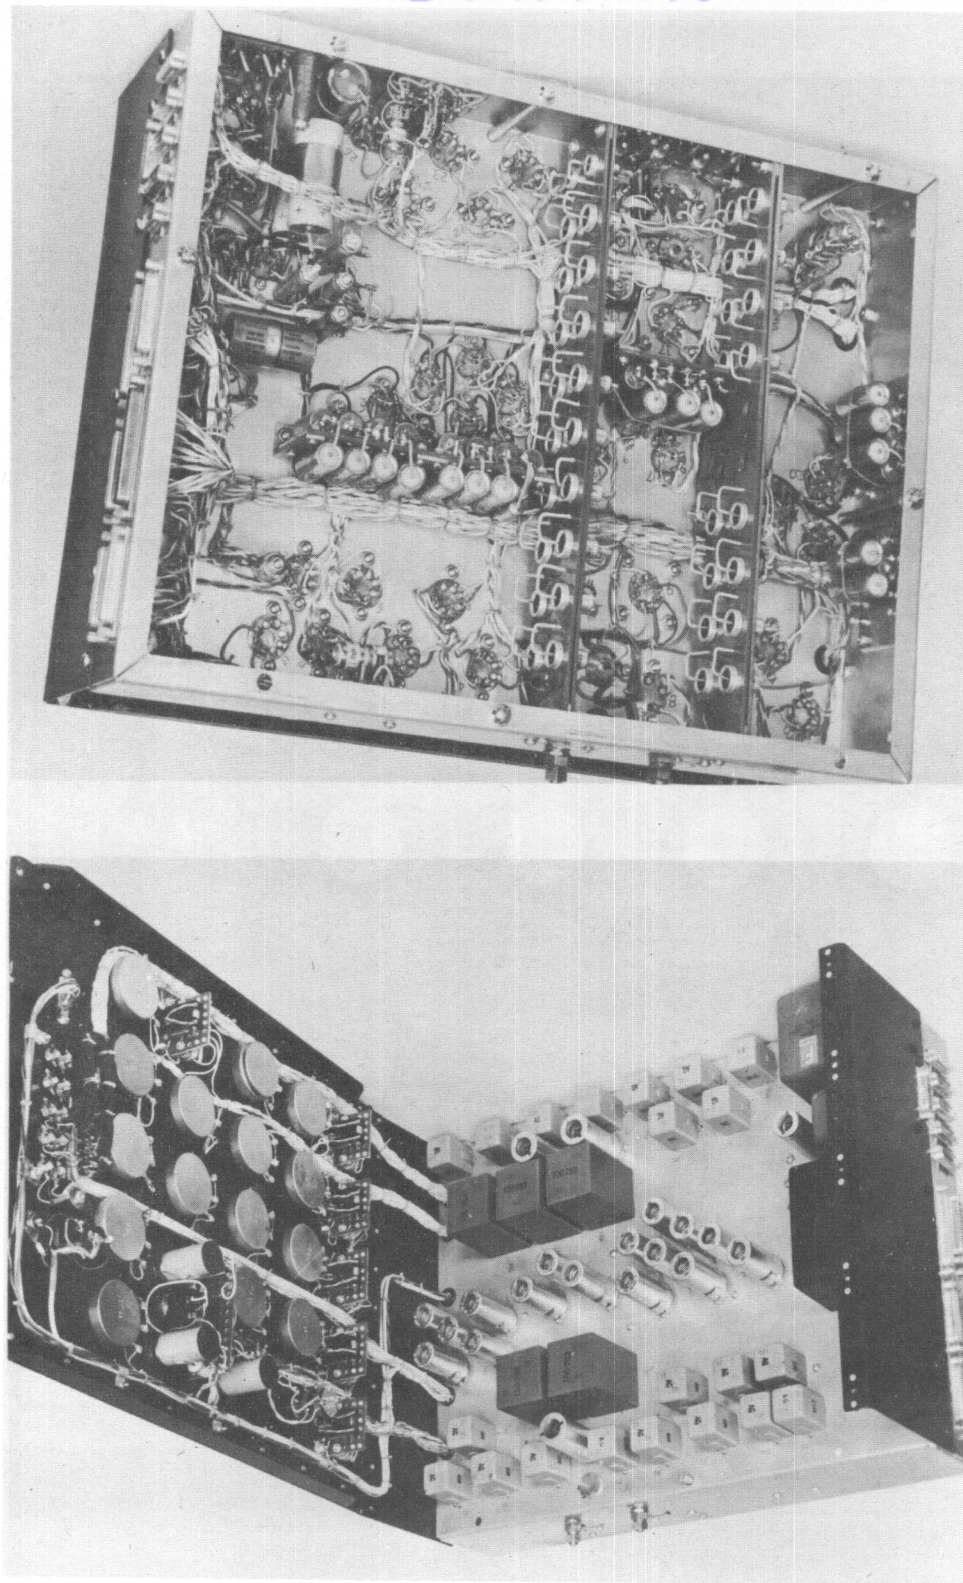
RECORDING MASTER UNIT - REAR THREE-QUARTER VIEW WITH HINGED FRONT PANEL
